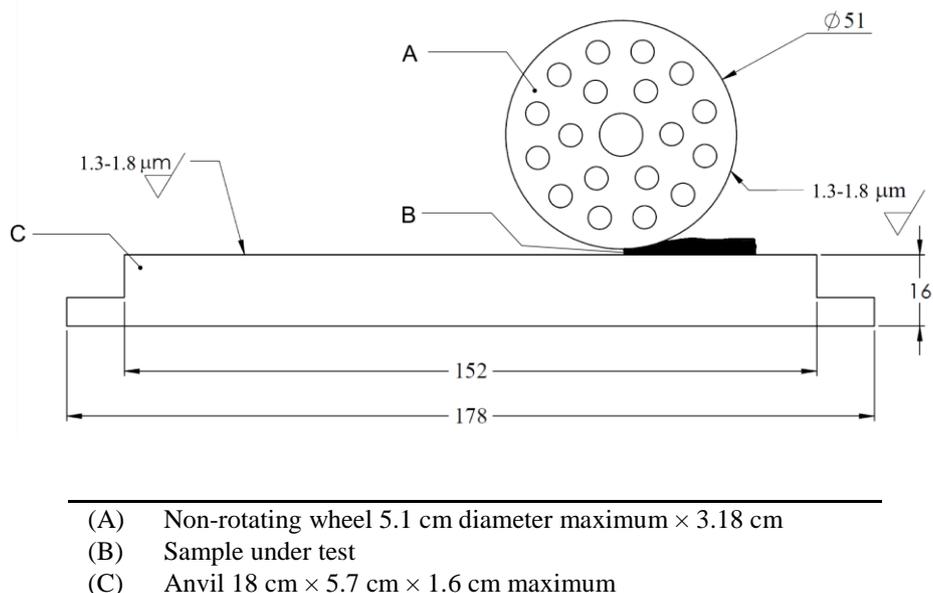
ABL Friction machine wheel and anvil detail”.
